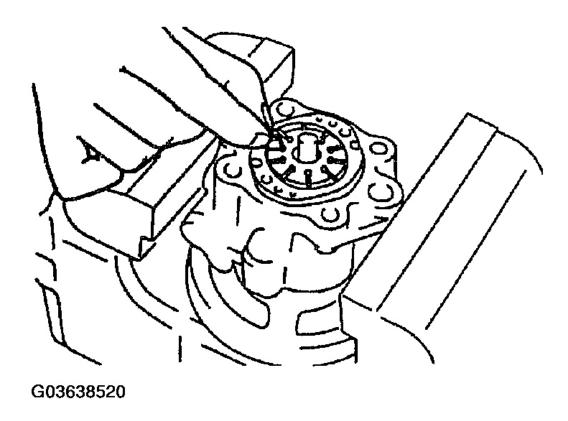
Installing Rotor With Identification Mark Facing Upward Courtesy of MAZDA MOTORS CORP.
